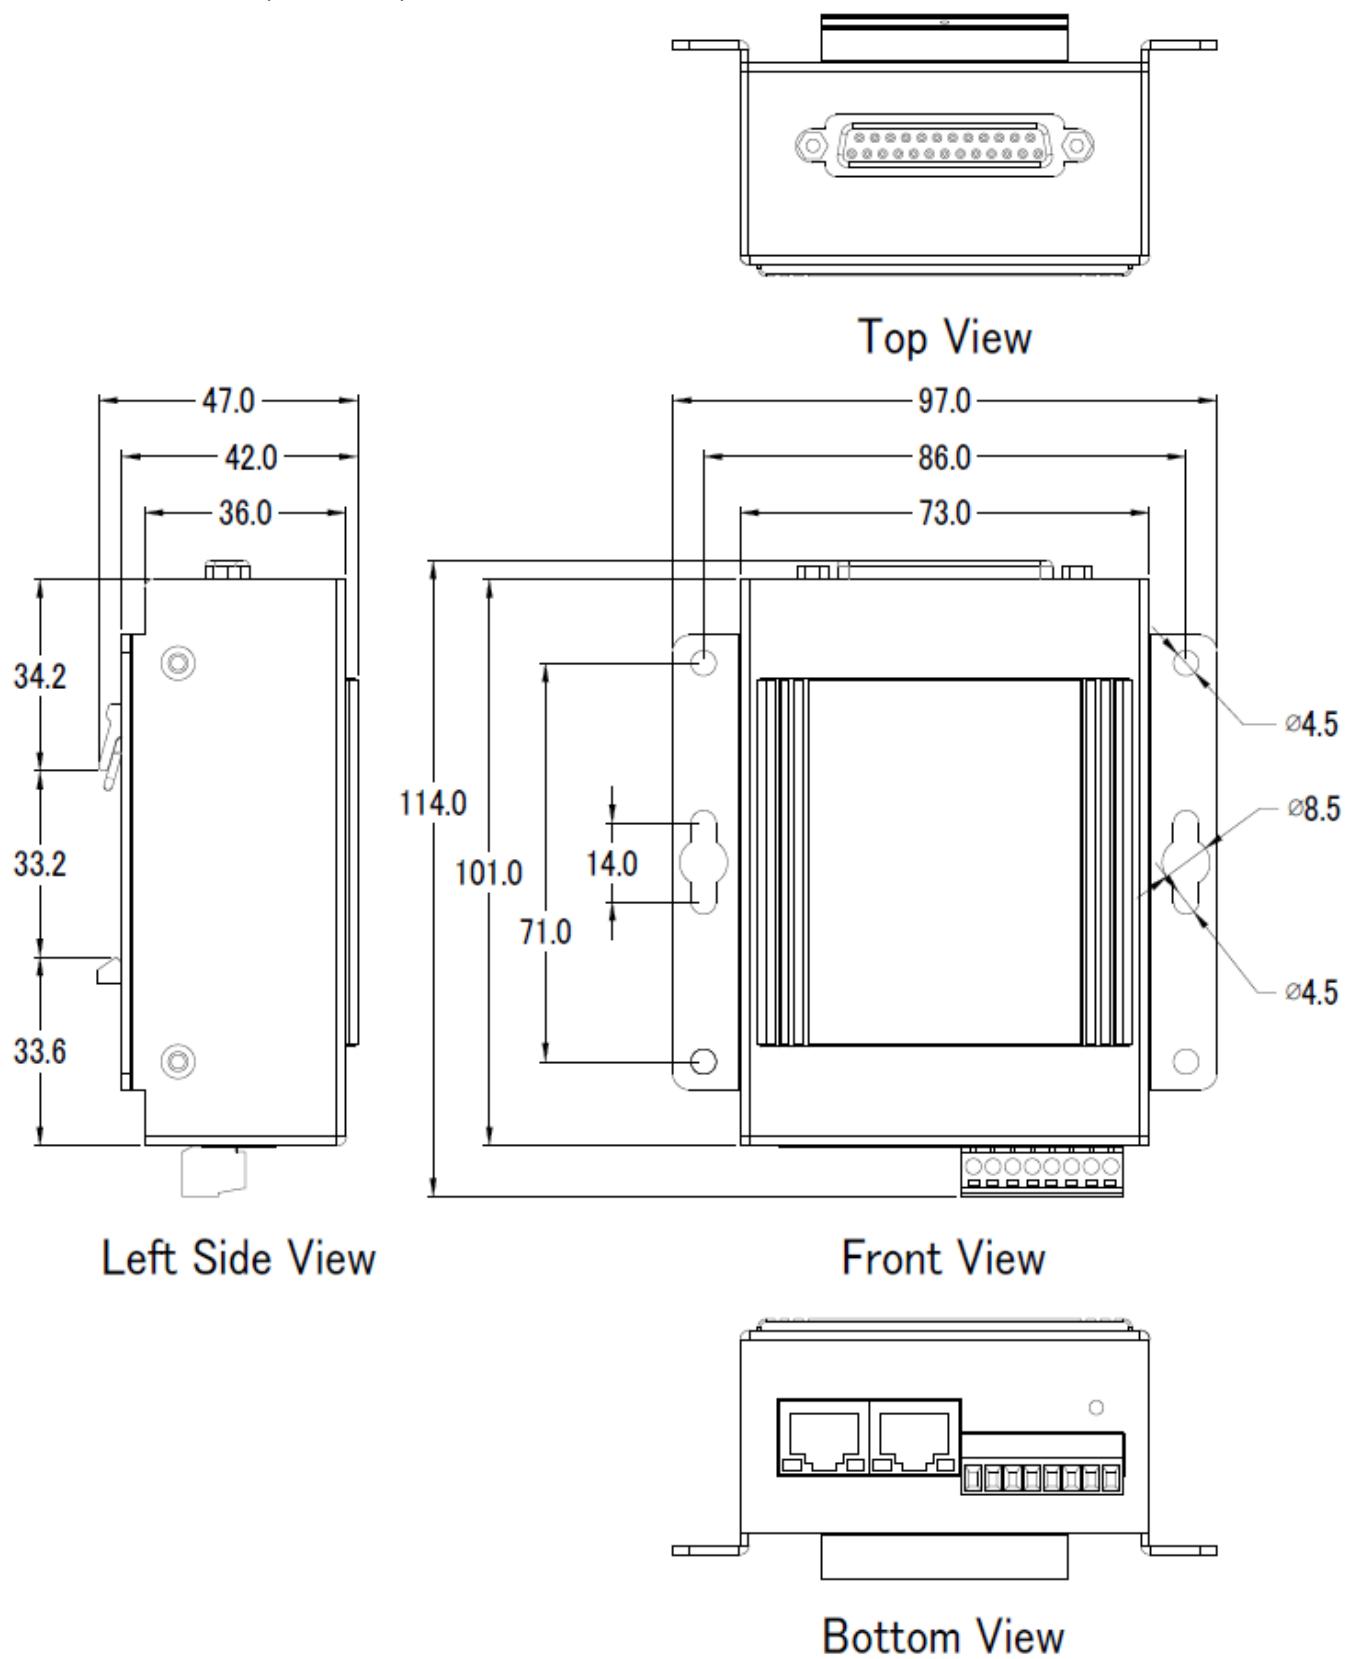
1-6 U-7518ZM/U-7519ZM Dimensions
